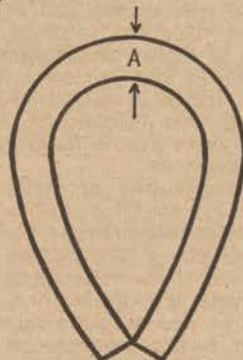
Bend Test of Vacuum Brake Hose.
